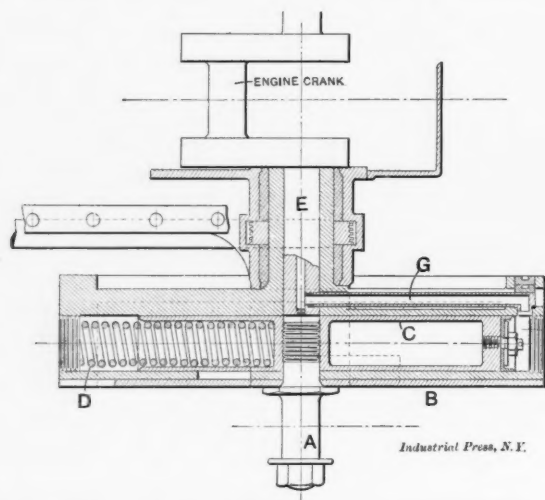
Section of Flywheel showing Hydraulically Operated Crank-pin.
